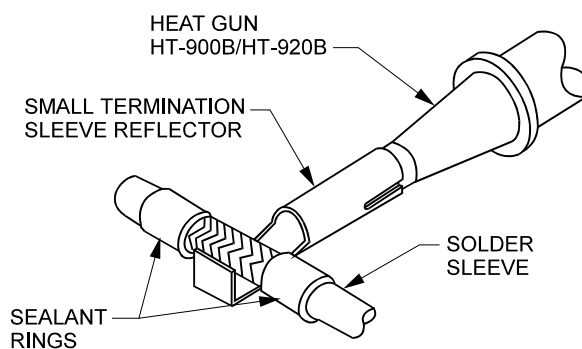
Installation of the M83519/1 Solder Sleeve
